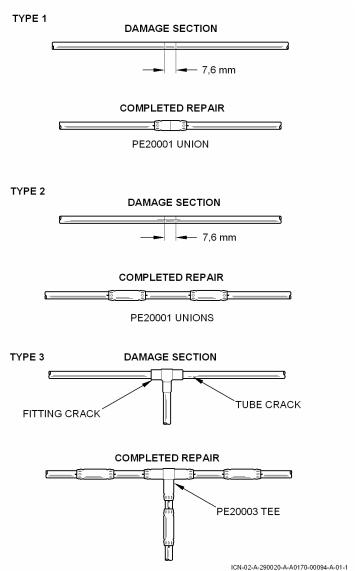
Permaswage Fitting - Installation (sheet 4/4)
